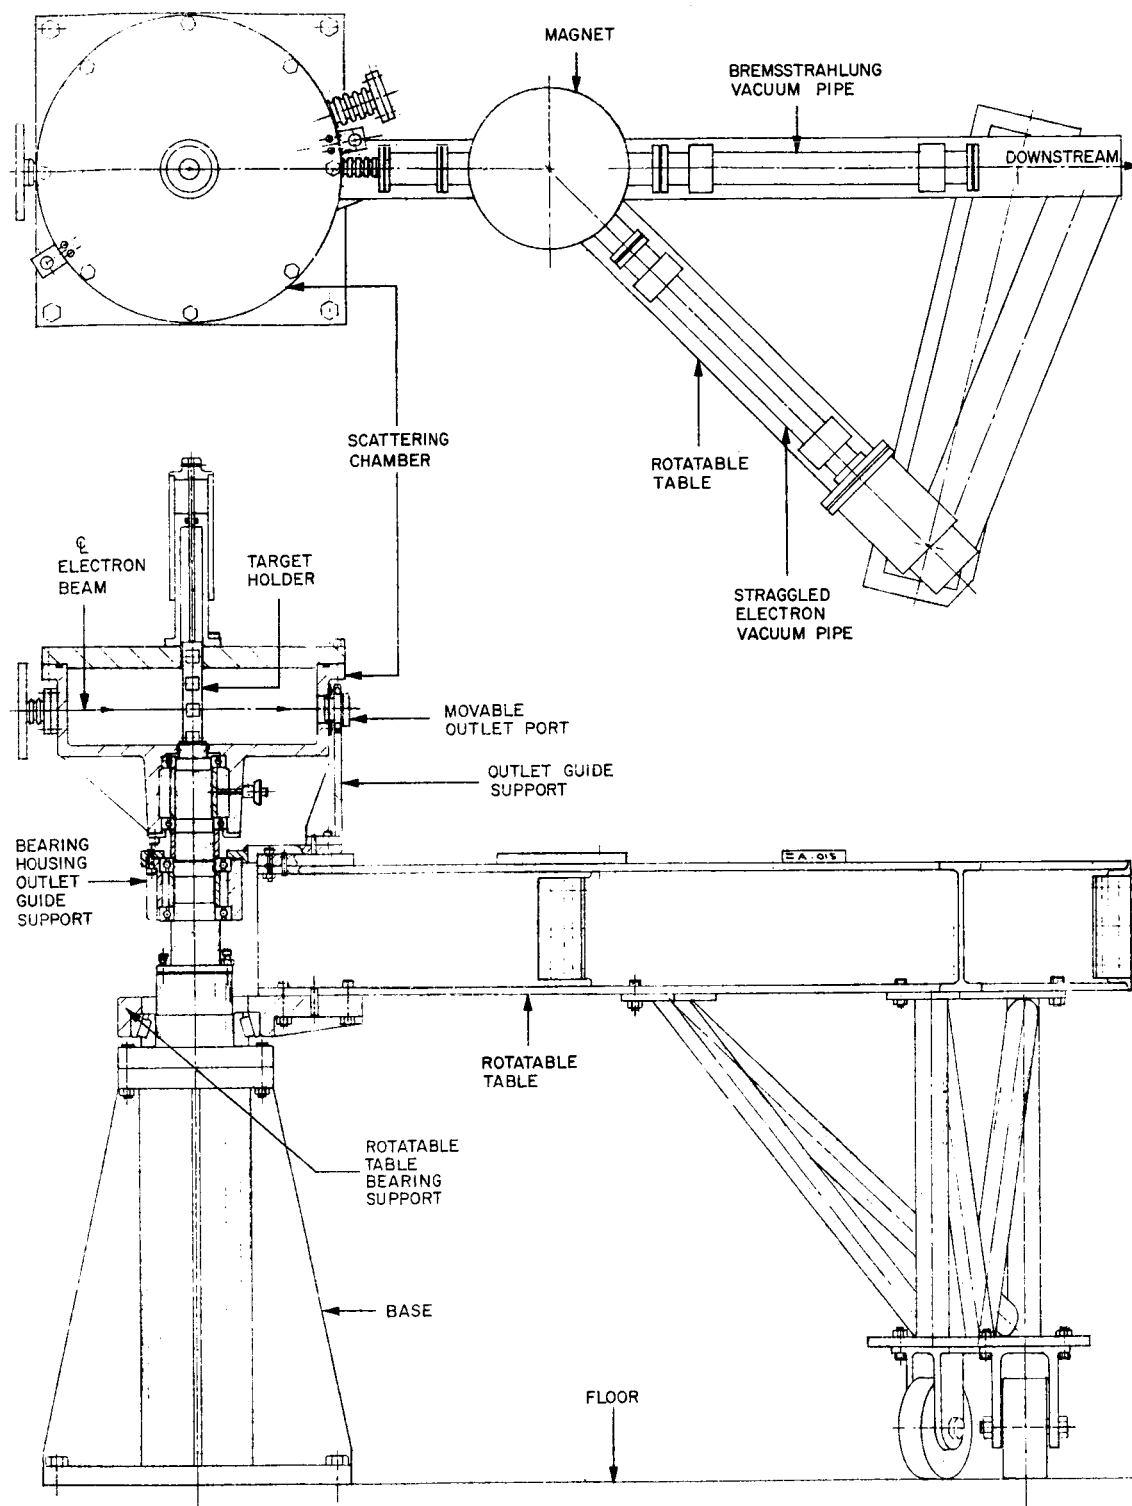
Detail drawing of scattering chamber plus rotatable detector support assembly
